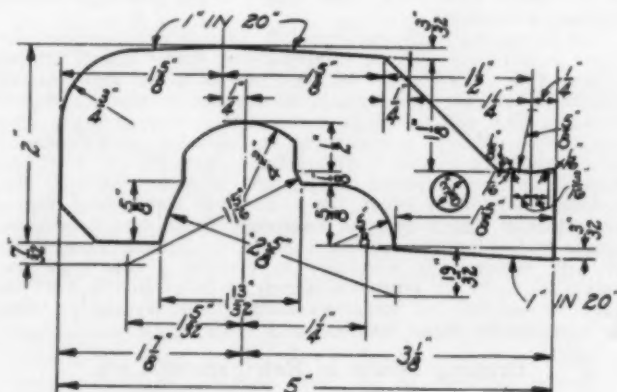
Proposed Maximum Flange Gage for Reinforced Flange Cast Iron Wheels
